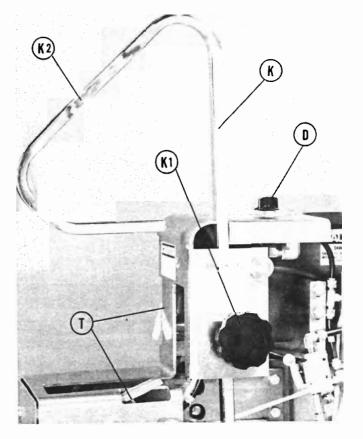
HOLD DOWN SKI - BOTTOM TAPING POSITION - RIGHT SIDE VIEW
